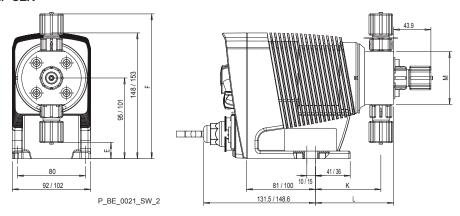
Dimensional drawing Beta b BT4b/BT5b, material versions PP and NP with self-bleeding dosing head SEK - dimensions in mm
